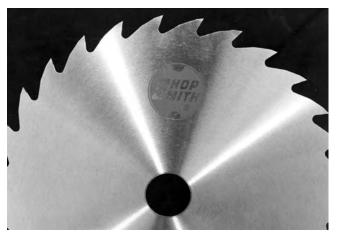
An all-purpose blade can be used for crosscutting, ripping, and mitering. It is a good "sizing" blade, but it will not cut as smoothly as some other special blades.
